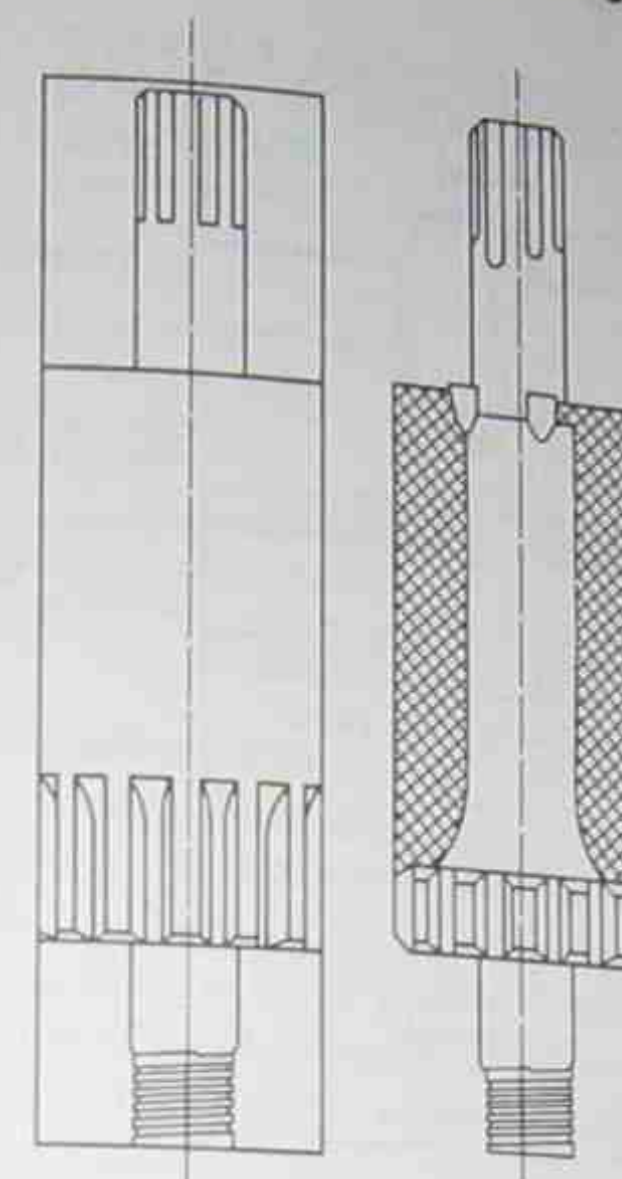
Two designs of a shaft made by machining (left) and cold forming (right). Crosshatched area on right indicates material savings.
